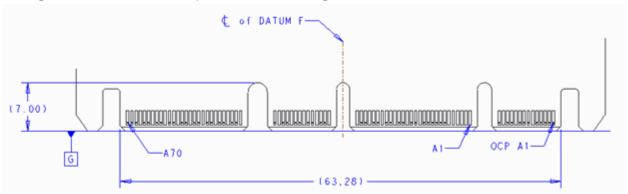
Large Size Card Gold Finger Dimensions – x32 – Top Side ("B" Pins)
